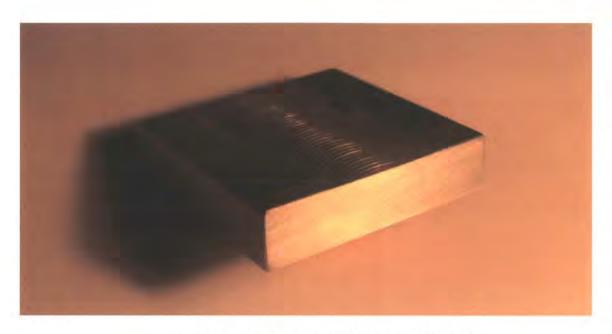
Unflawed Section of C2 Weld from TRIAL 5
